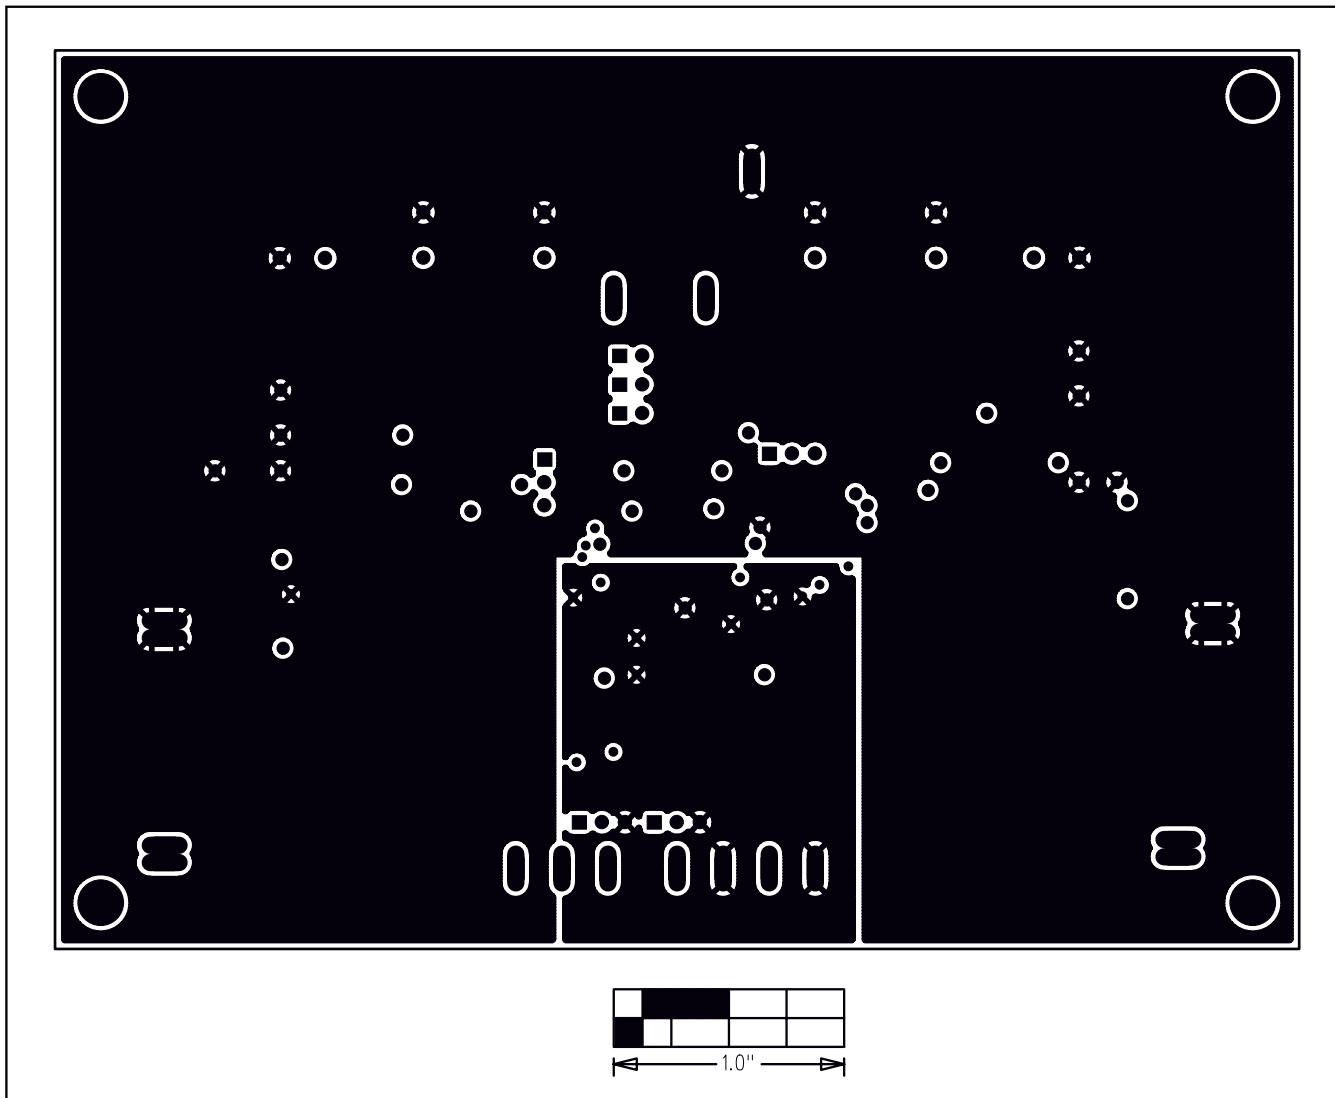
MAX8537 EV Kit PC Board Layout—GND Layer
